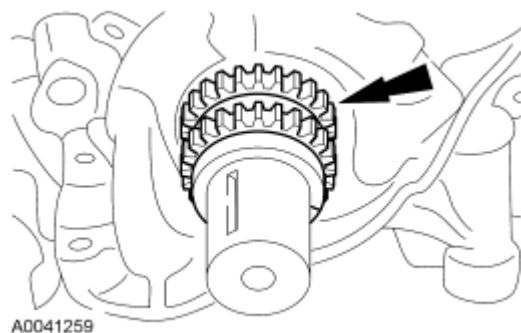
Locating Crankshaft Sprockets With Timing Marks Out
